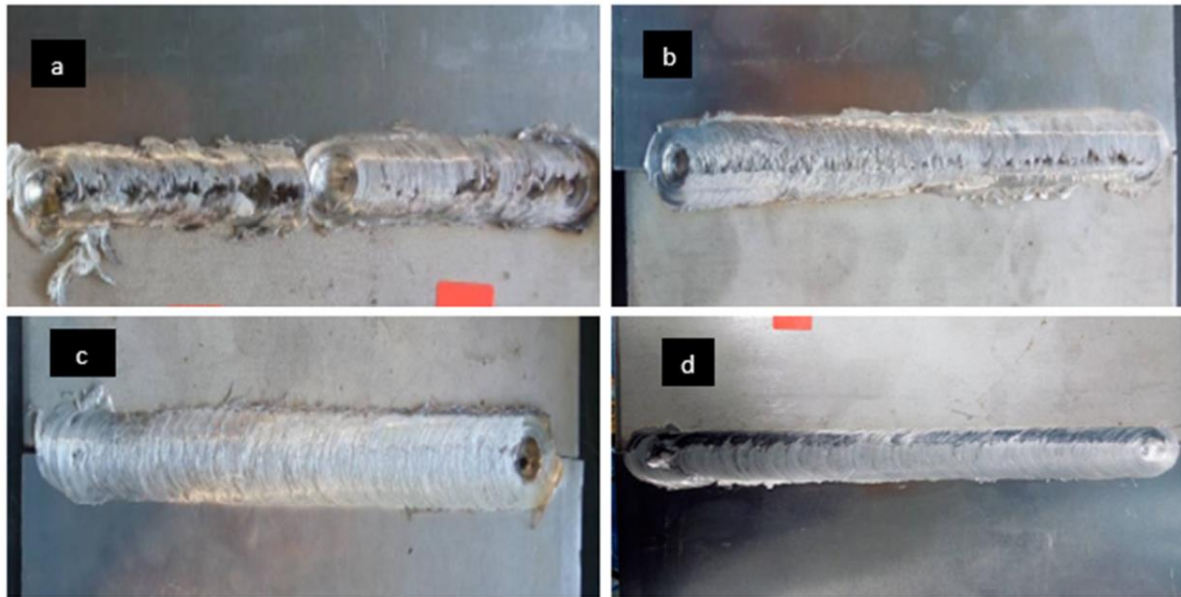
Characteristic FSW defects: (a) Subsurface tunnel cavity (inadequate material consolidation), (b) Weld-line groove (insufficient forging), (c-d) Linear root cracks (tilt-plunge mismatch)[73]
